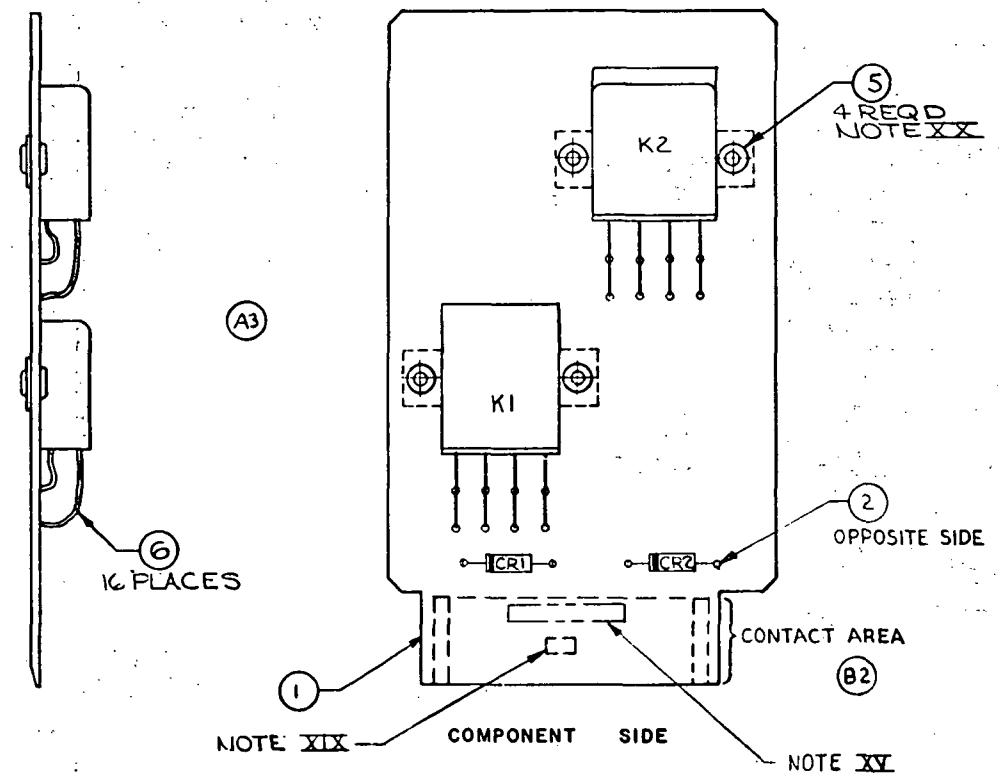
AC Power Box (02B8) Assembly Drawing
